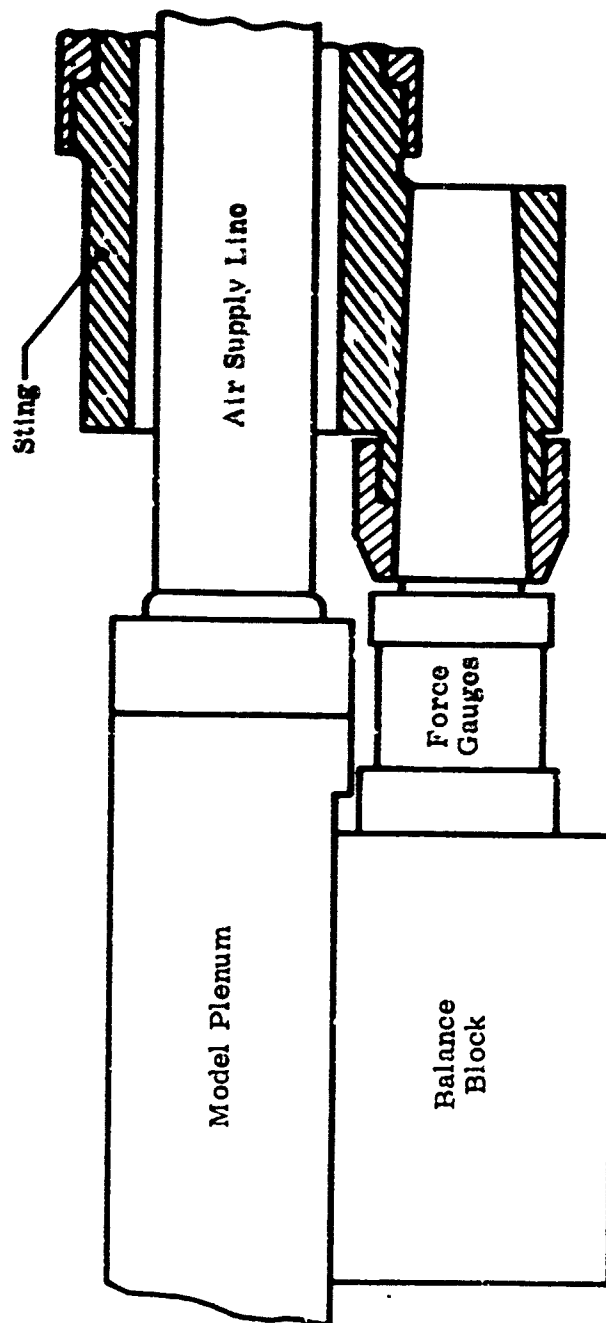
AIR SUPPLY STING - BALANCE ASSEMBLY
